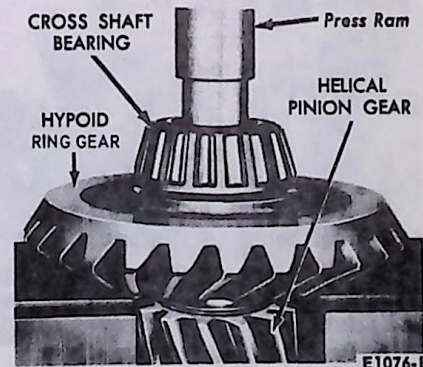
Removing Cross Shaft Bearing and Hypoid Ring Gear
